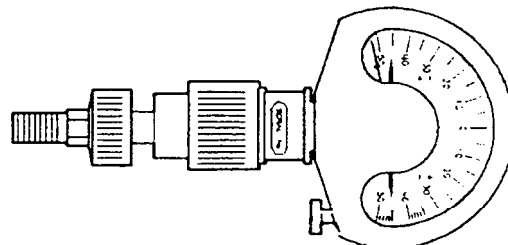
Gaging a 3.5 mm Female Connector Using a Screw-on Type Gage
